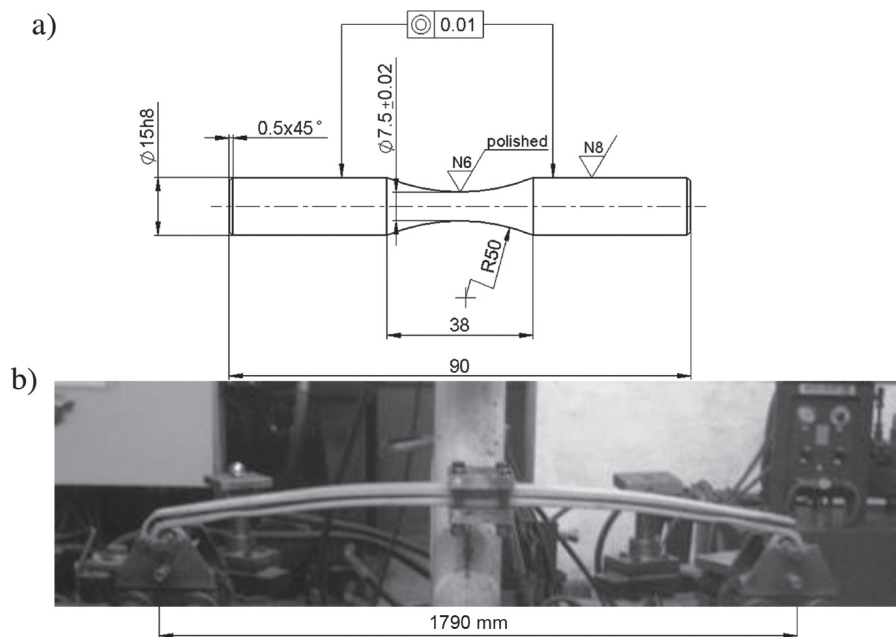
a) Rotating bending test specimen, b) example of spring test setting
